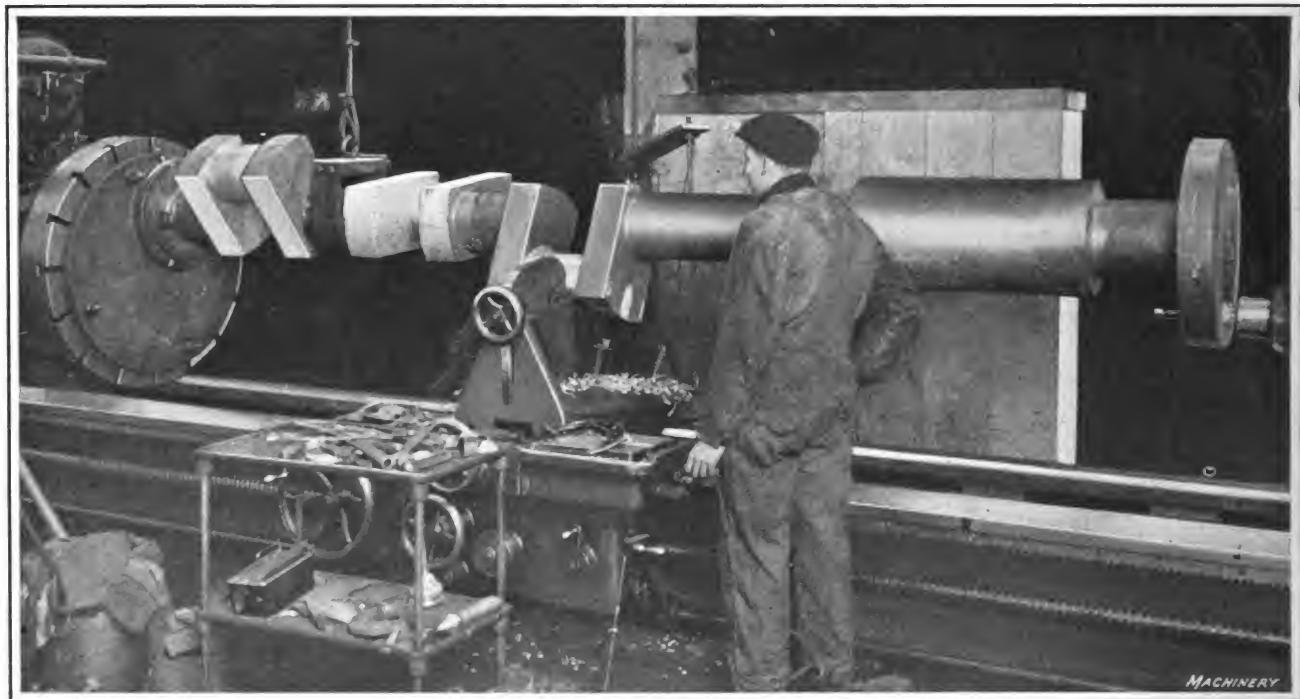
Turning the Skandia crankpin. Note the special design of tool support (See Fig. 3)
